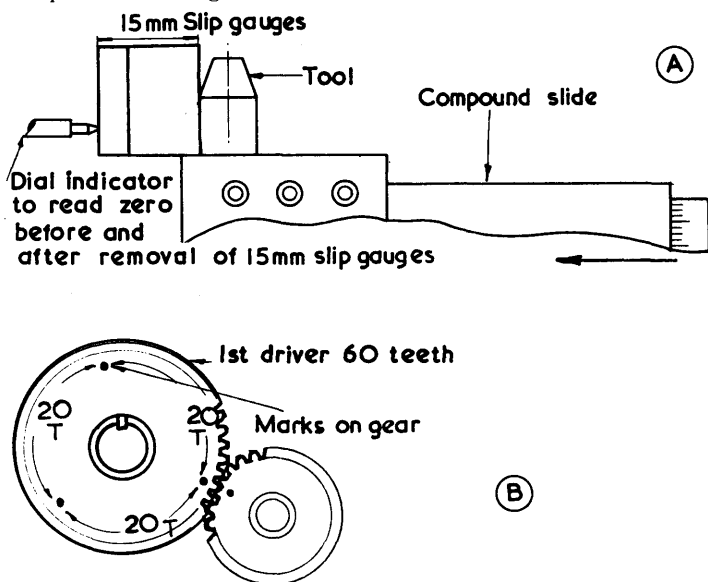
Methods of obtaining Precise Tool Movement.
